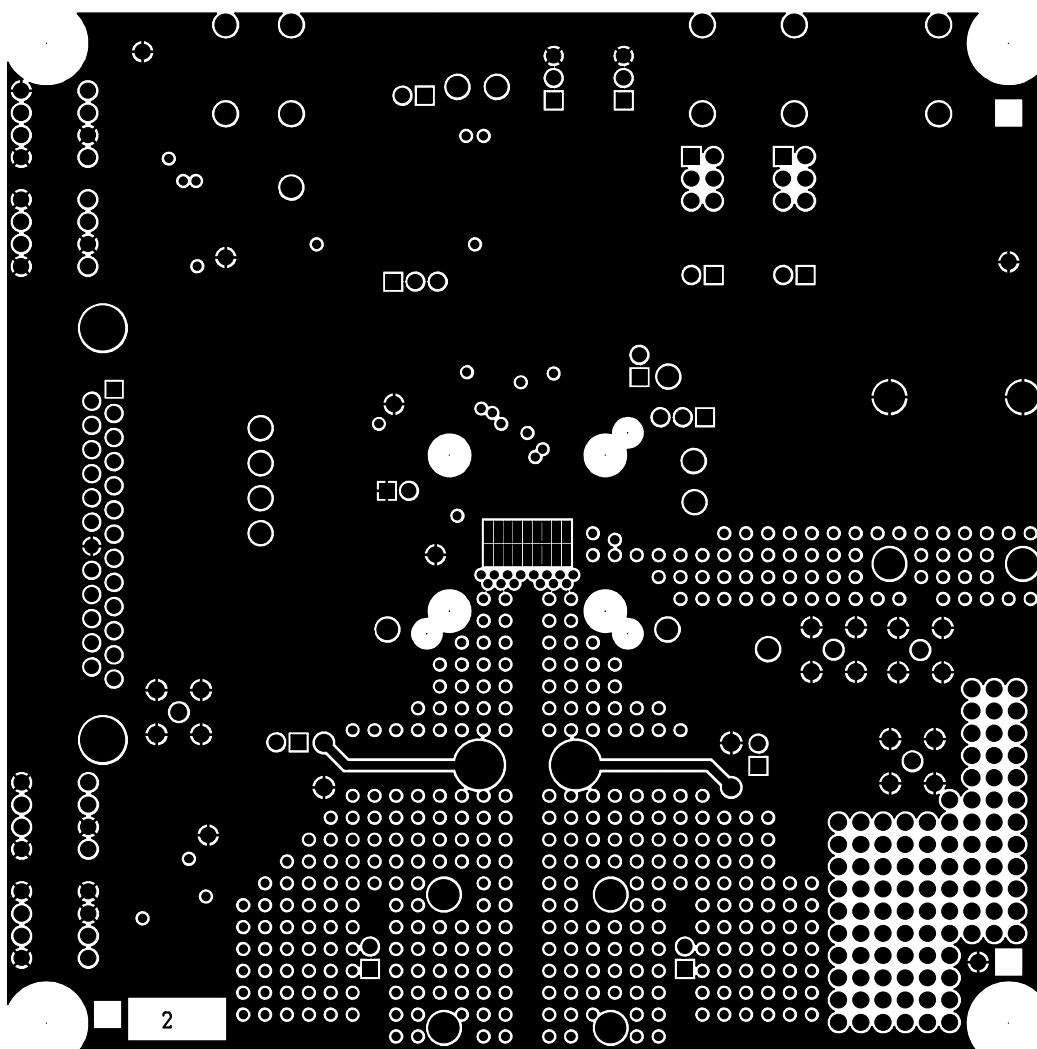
KIT06XS4200EVBE Assembly Layer Bottom
